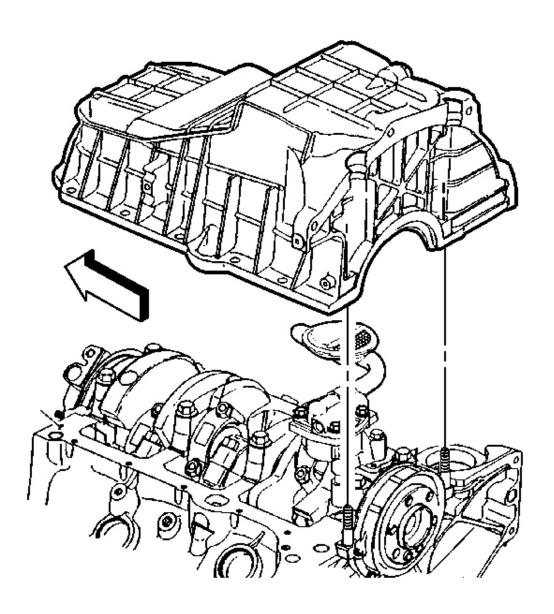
View Of Oil Pan Courtesy of GENERAL MOTORS CORP.
